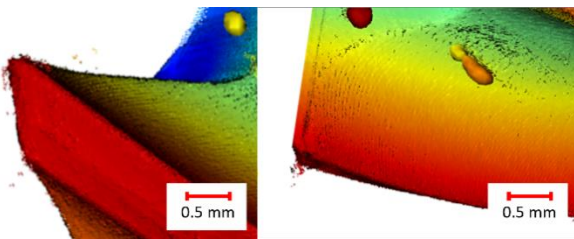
Images of the new tool (a) flank and (b) rake faces taken from the 3D reconstruction.
